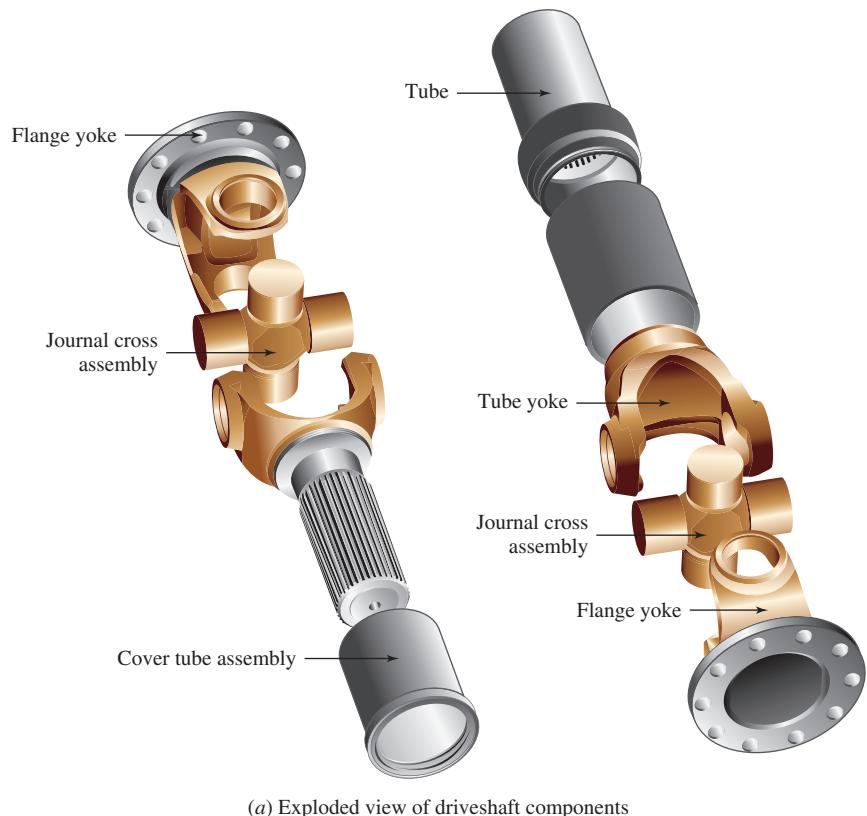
Industrial drive shaft incorporating a pair of universal joints (GWB - A Dana Brand)
